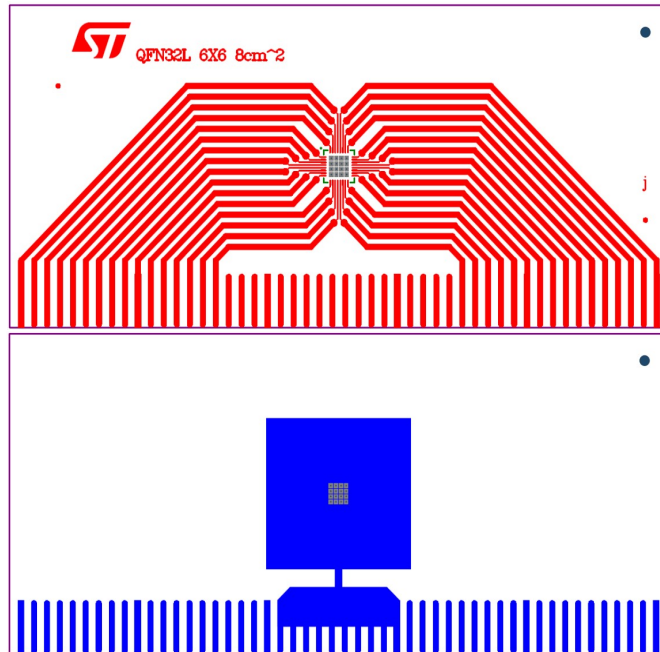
QFN (6x6 mm) PCB 4 layer<sup>2</sup>
